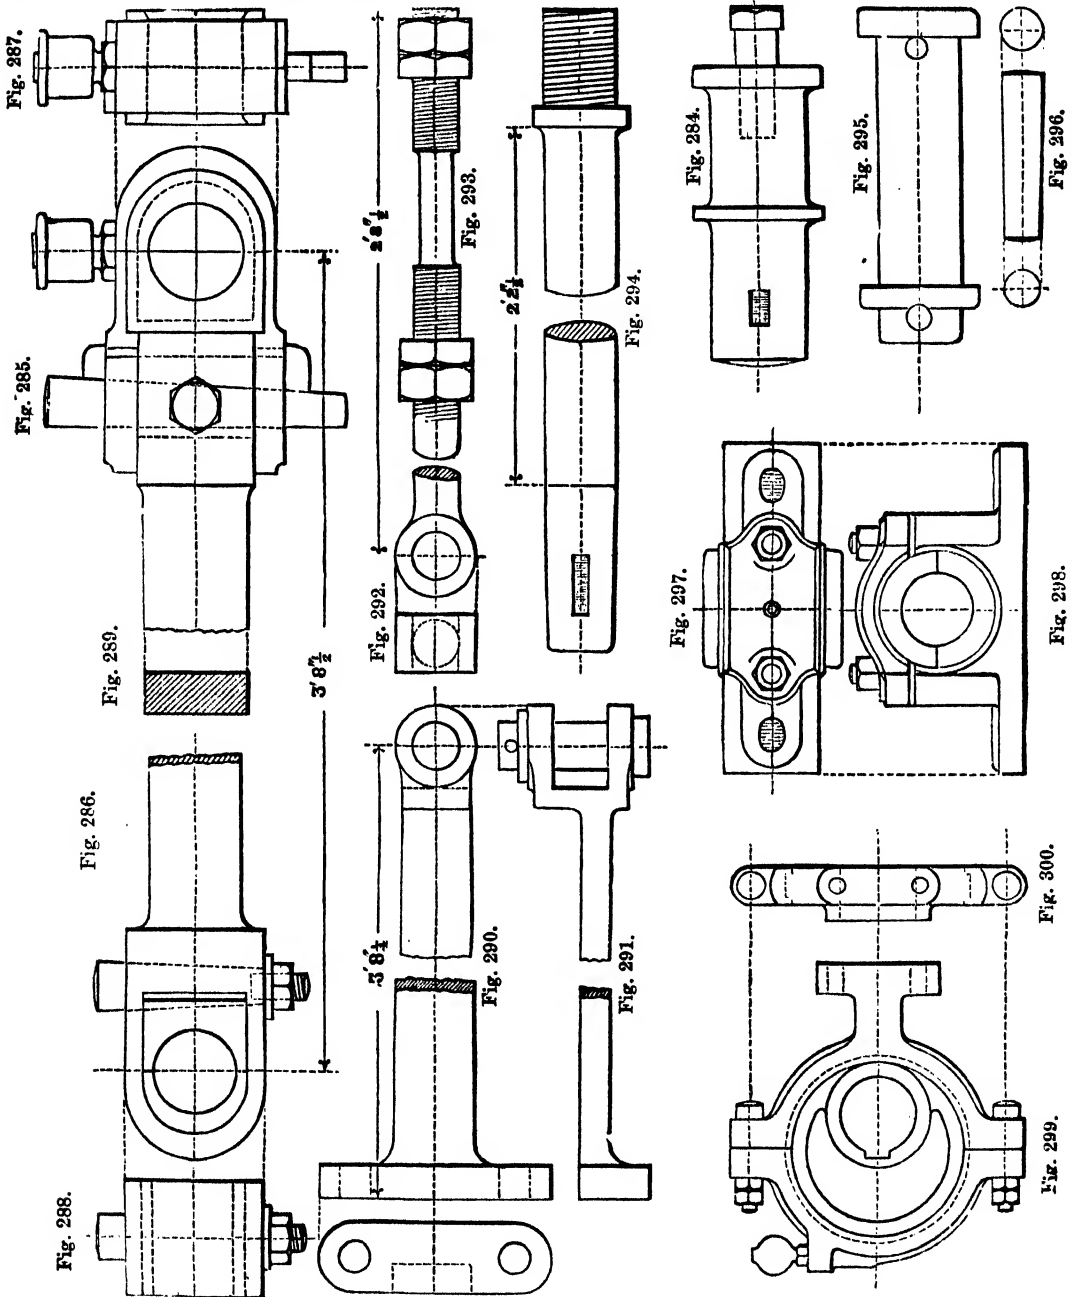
and 291 are views of the eccentric-rod, which is merely a smaller and lighter connecting-rod between the eccentric and slide-valve. Both connecting-rod and eccentric-
